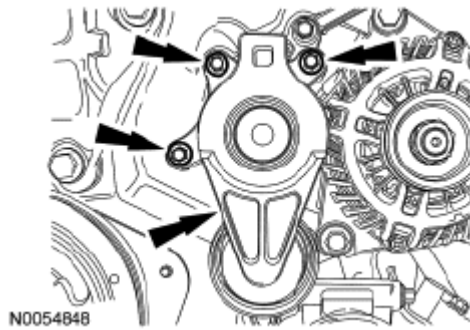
Locating Accessory Drive Belt Tensioner Bolts
